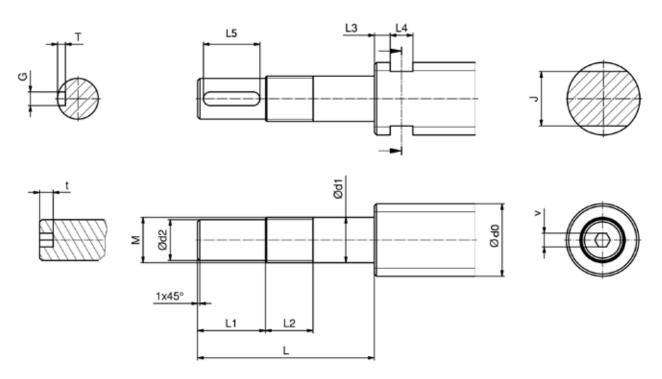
Dimension standard end machining for BST bearings and BSTK bearing units
